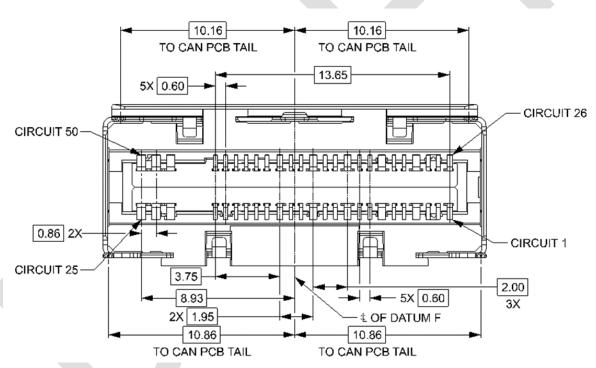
Bottom View of Fixed-Side Connector (2 of 2)
